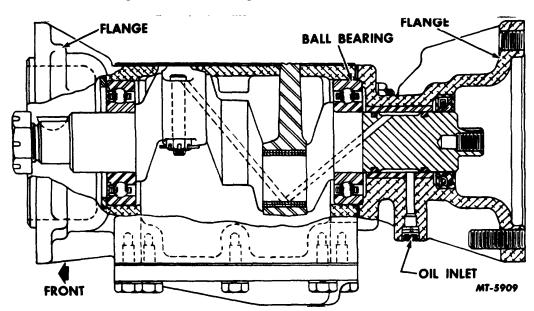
Crankcase of Flange-Type Air Compressor (Long Version)
